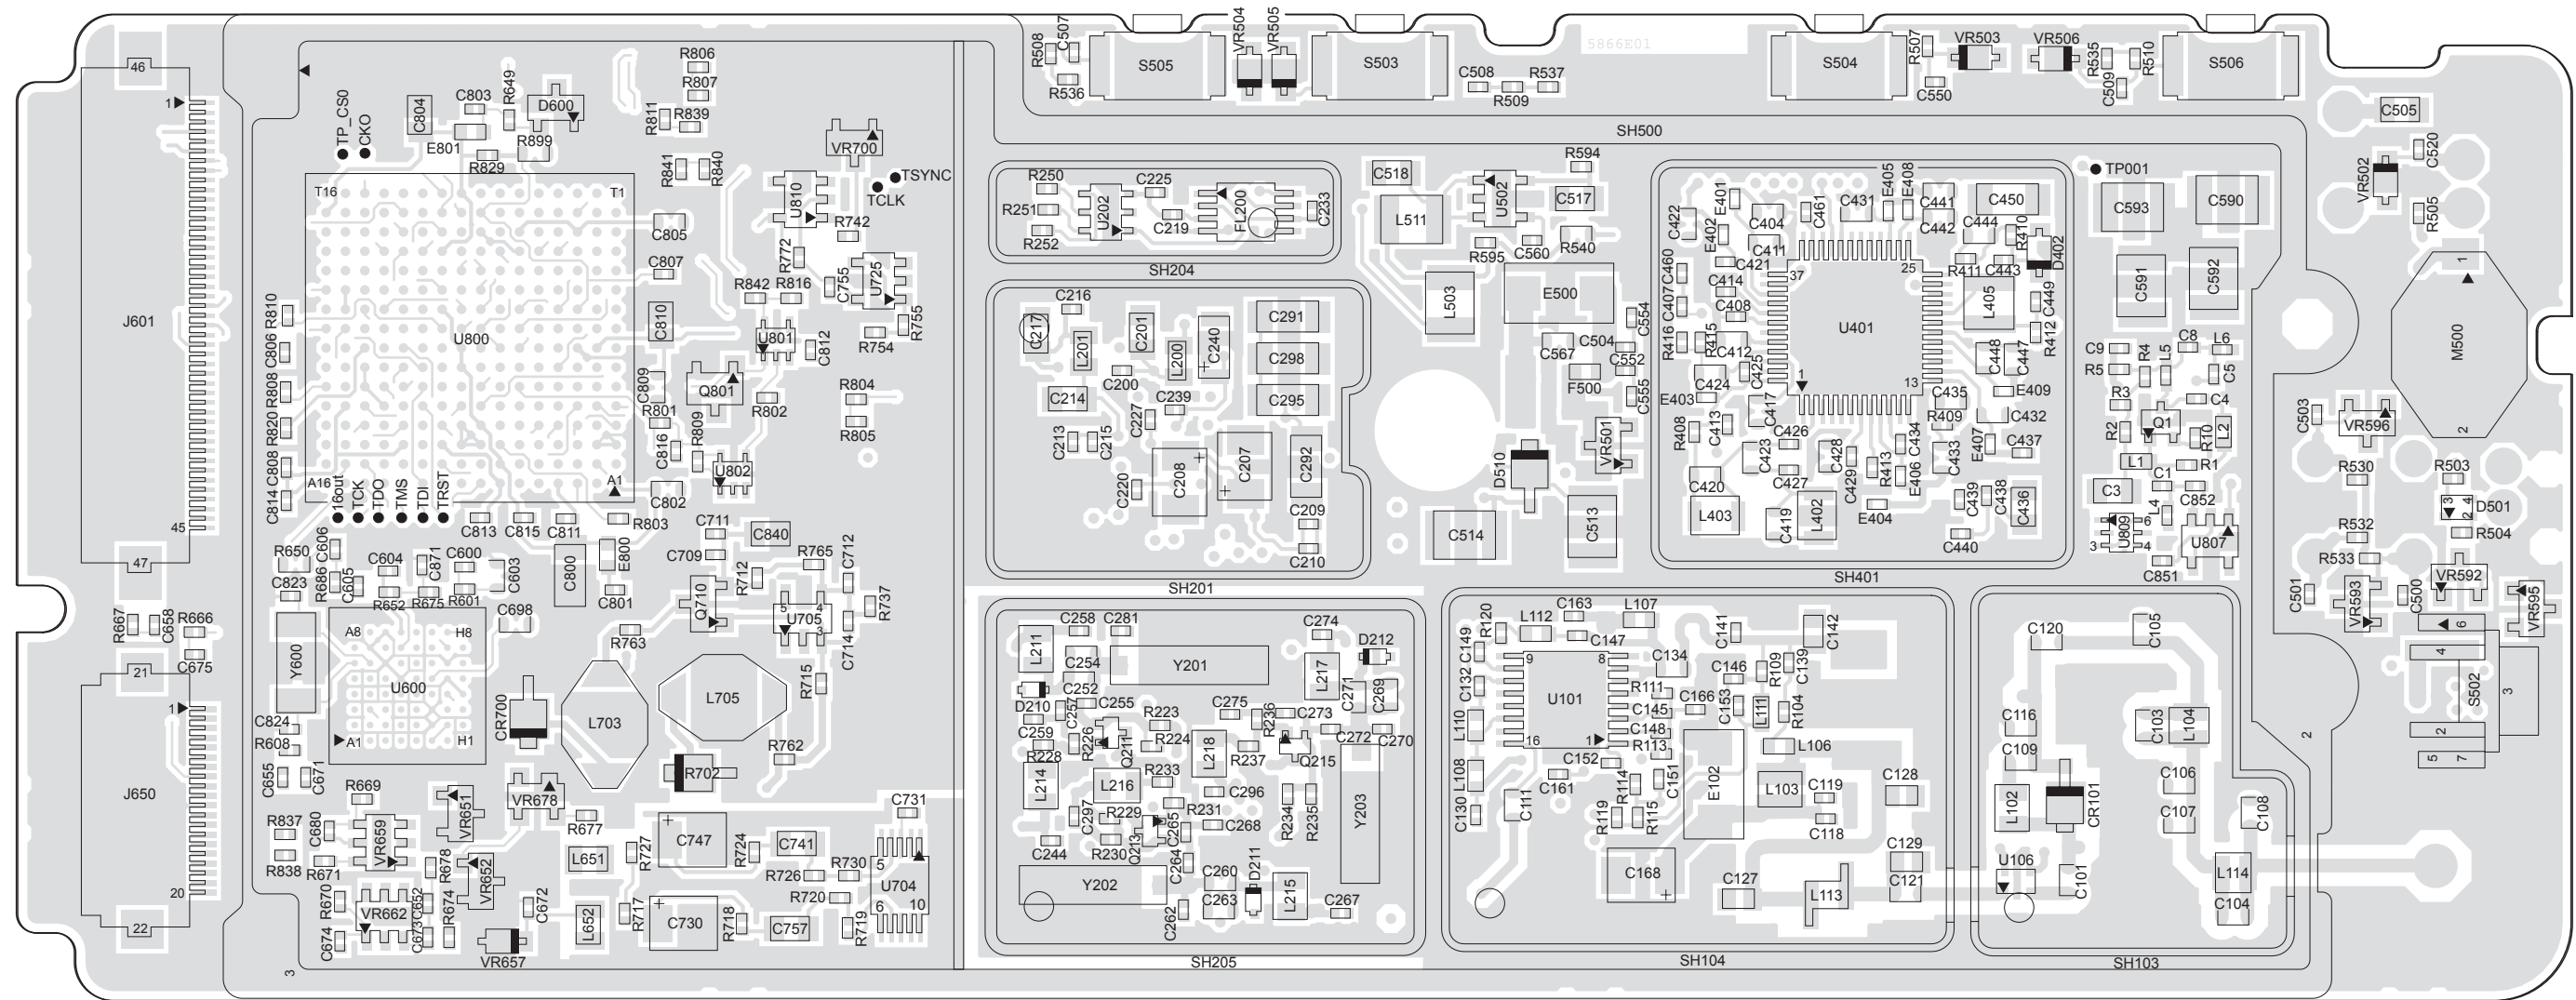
PMUF6541G Main Circuit Board Component Location Detail, Viewed from Side 1
